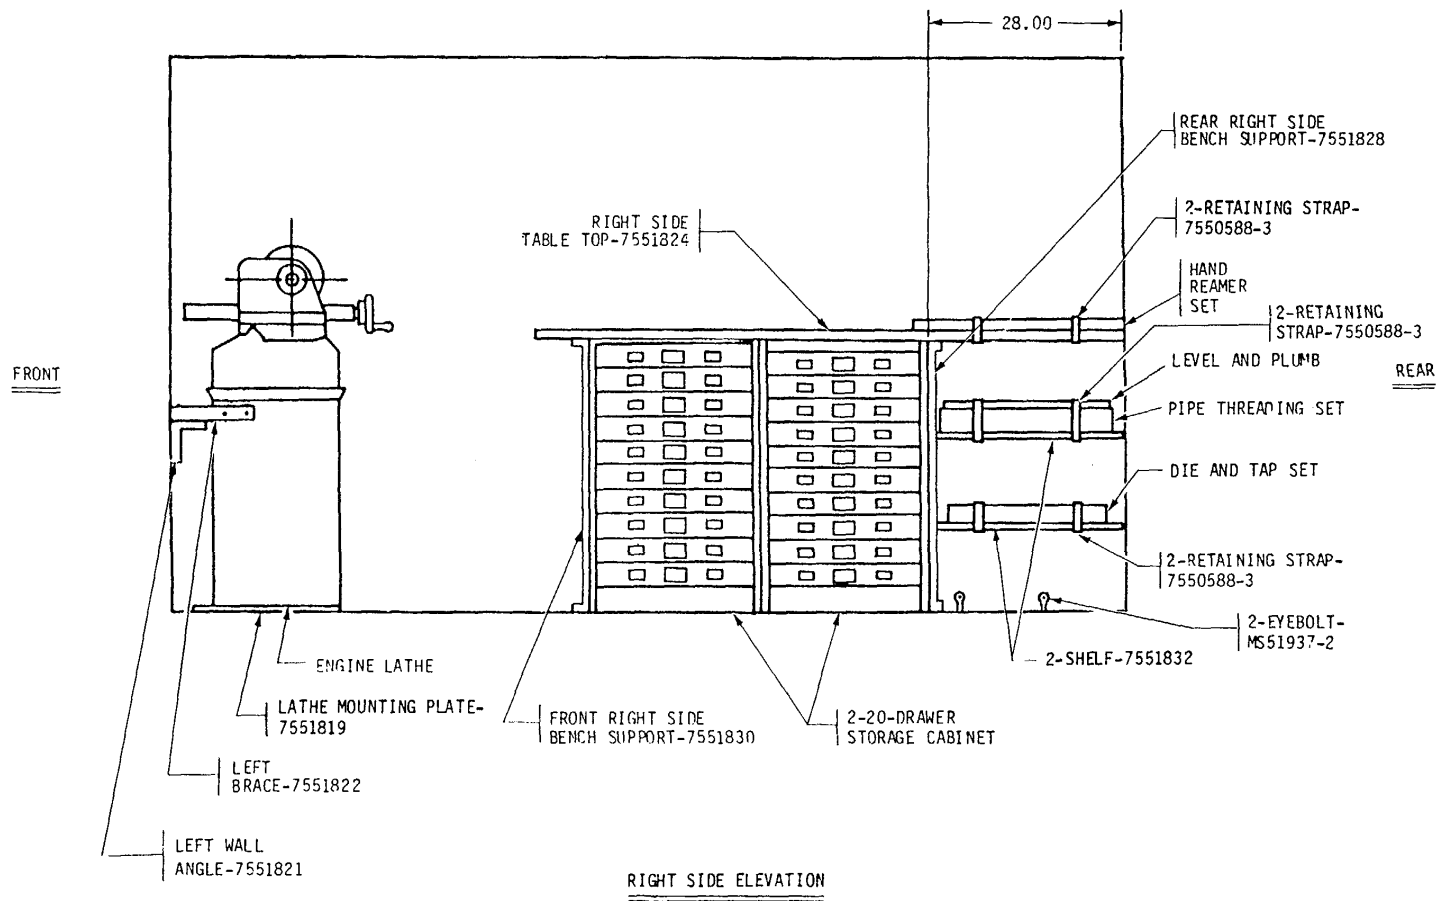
Components to be mounted, unit 1, 280, right side elevation.
